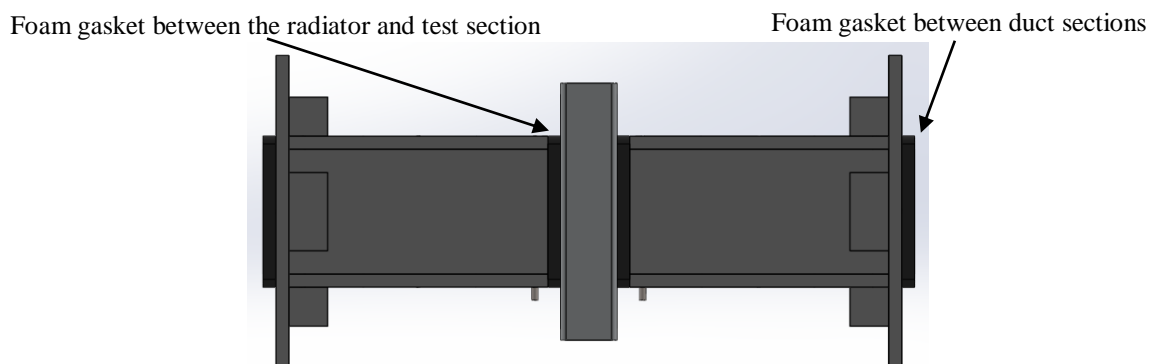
SolidWorks model of the test section depicts the use of closed-cell foam gasket material and metal tube location
